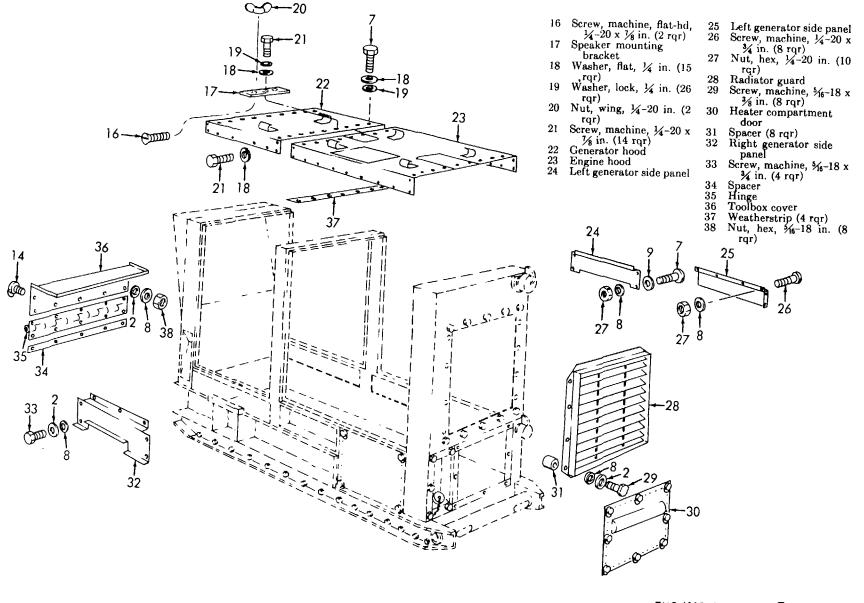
Hood, doors, and panels, removal, disassembly, reassembly, and installation.
